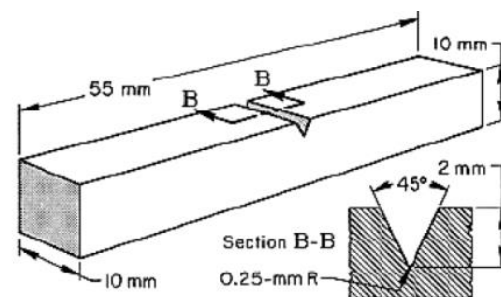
Standard Sample Dimensions of Charpy Impact Test [19].
